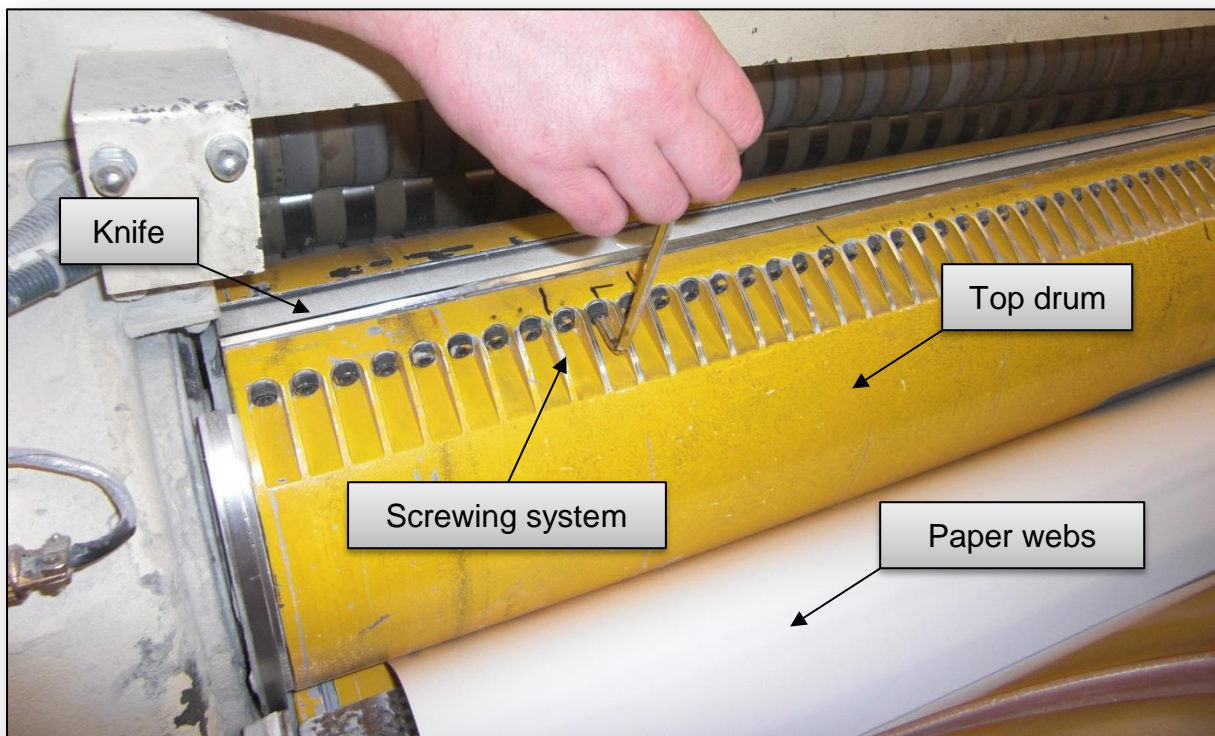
Rotary cross cutter knife and system to adjust the clearance
